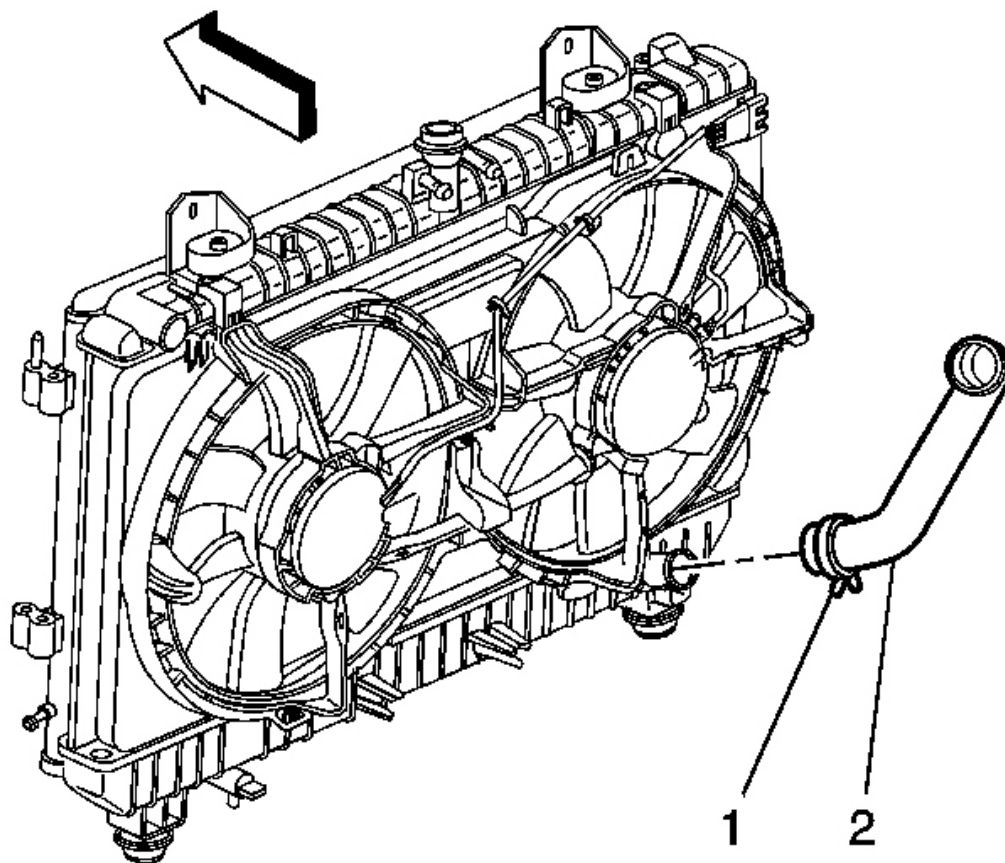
Radiator Outlet Hose & Clamp At Radiator
